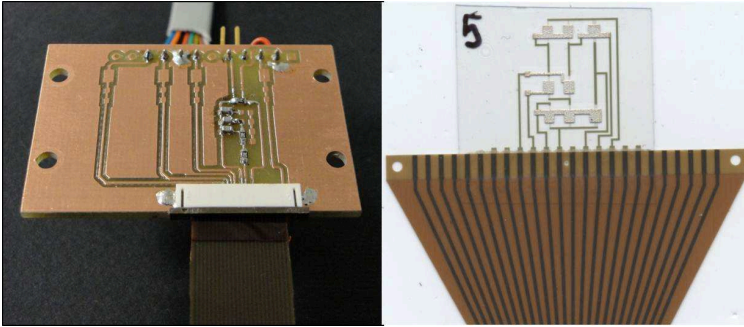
Detailed photograph of the PCB and the operational amplifier glued on flexible flat cable.
